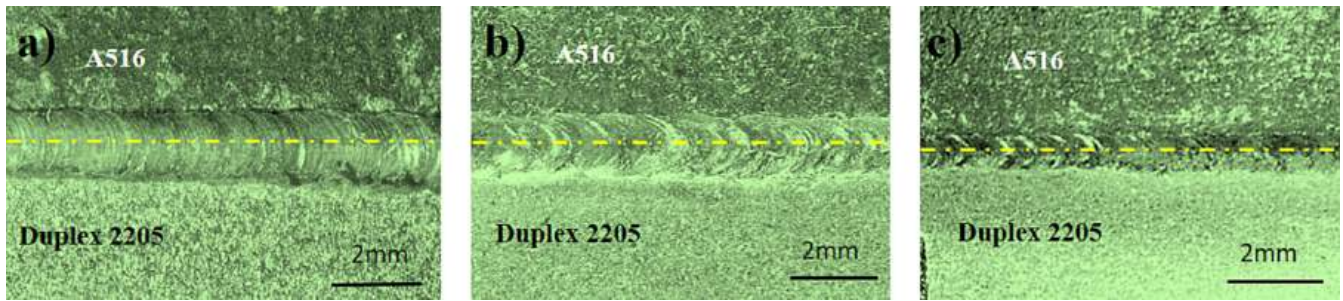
Weld bead shape at laser power of 400W at focal distance different welding speed of a) 3mm/s, b) 4 mm/s, and c) 5 mm/s.
